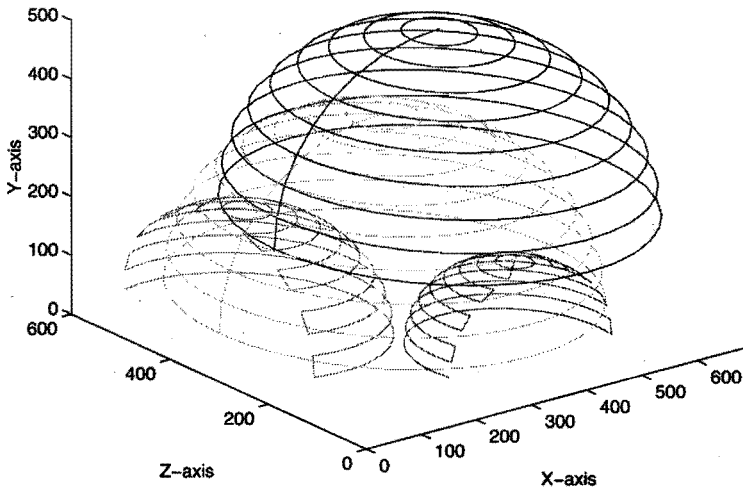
An example of some ball bar measurements carried out on different locations and with different radii to cover the whole workspace of a machine tool.
